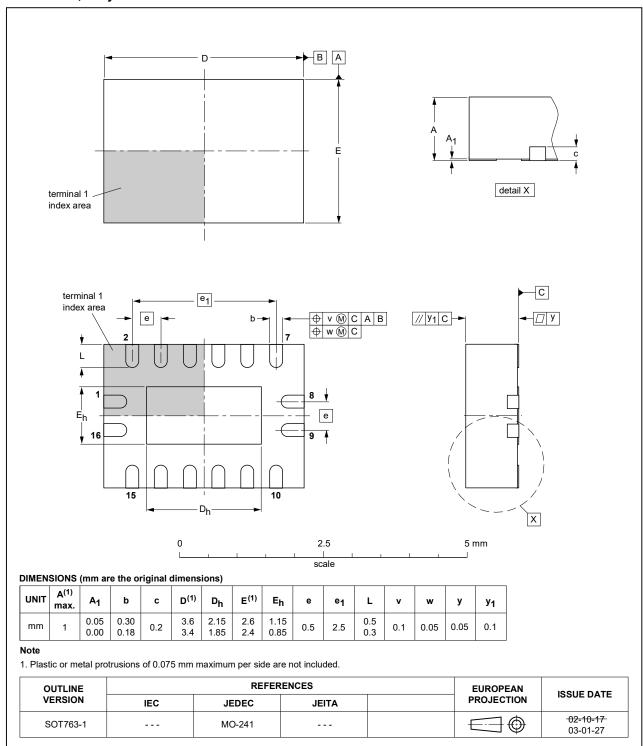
Package outline SOT763-1 (DHVQFN16)
